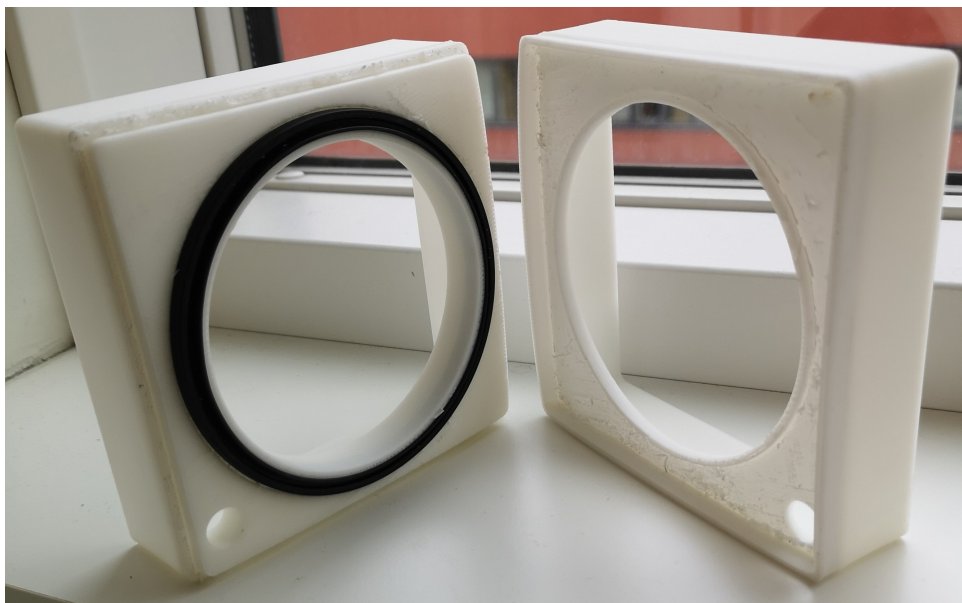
Second 3D-printed prototype with screw threads, A1
